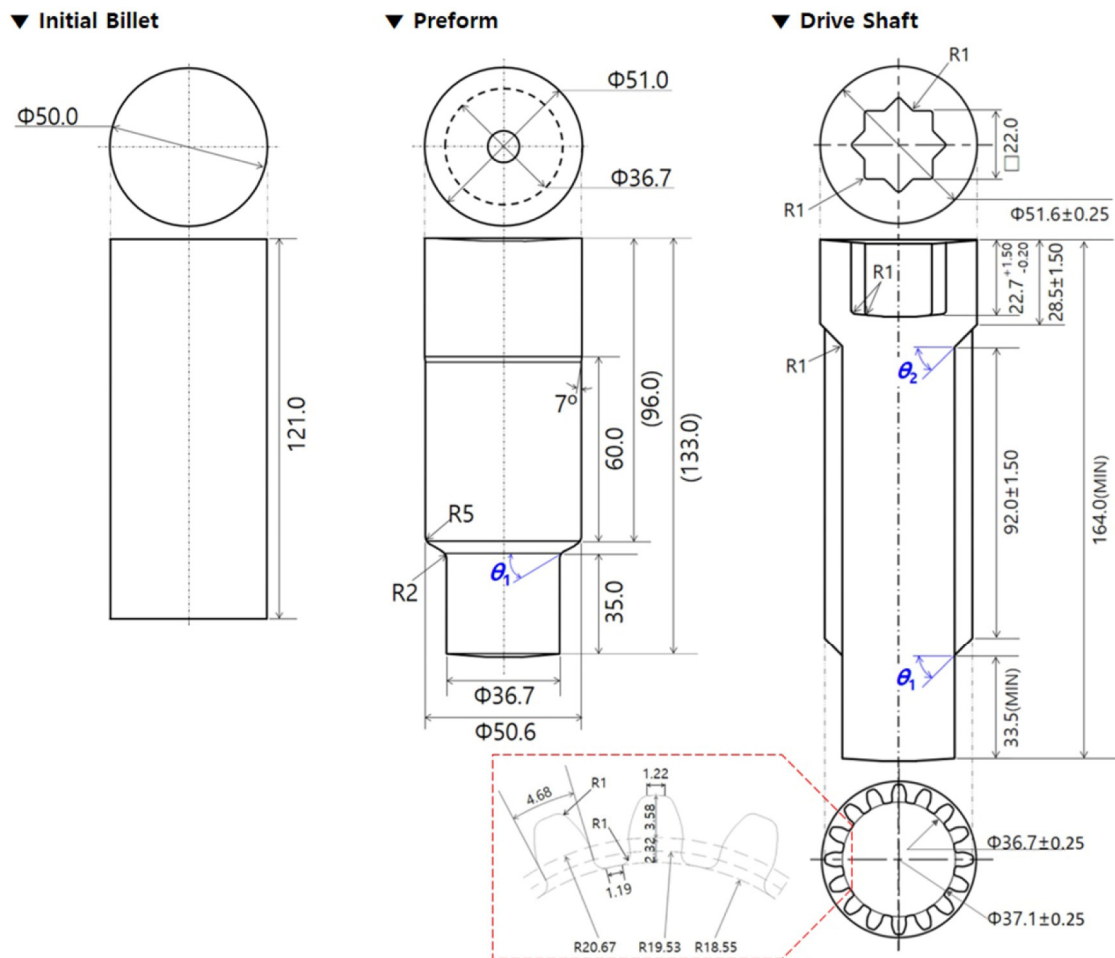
Schematic views of process flow and detail dimensions for cold forging of drive shaft with shoulder angles of 45° and 45° for θ_1 and θ_2 (unit : mm).
